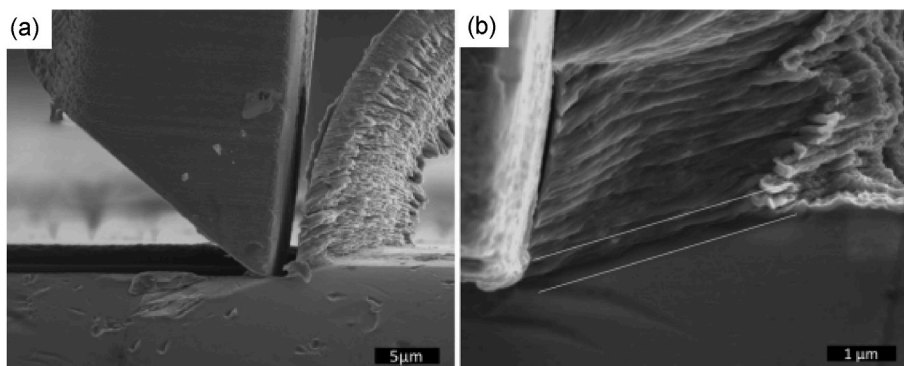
In-situ SEM micro-cutting test on aluminium 7475 (a) Lateral overview of the system workpiece-chip-tool. (b) Steady state shape of fully developed PSZ [67].
